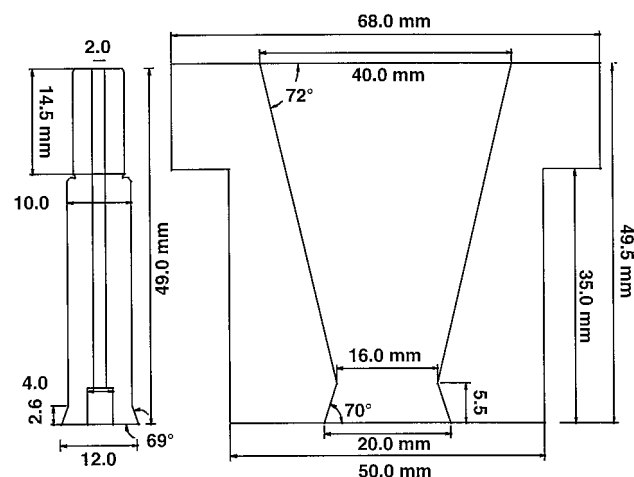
Mandrel and die bushings used in continuous blow molding.
